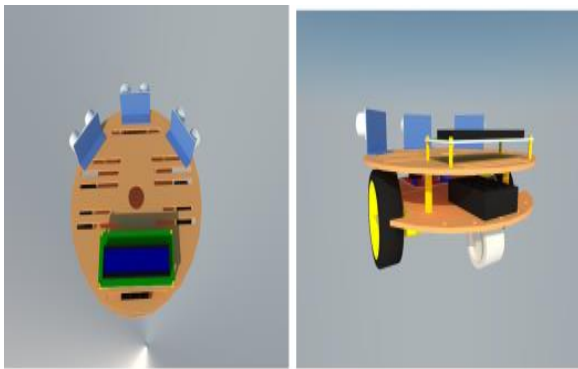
Mechanical structure and components layout of the wheeled mobile robot; top view (left) and side view (right).
